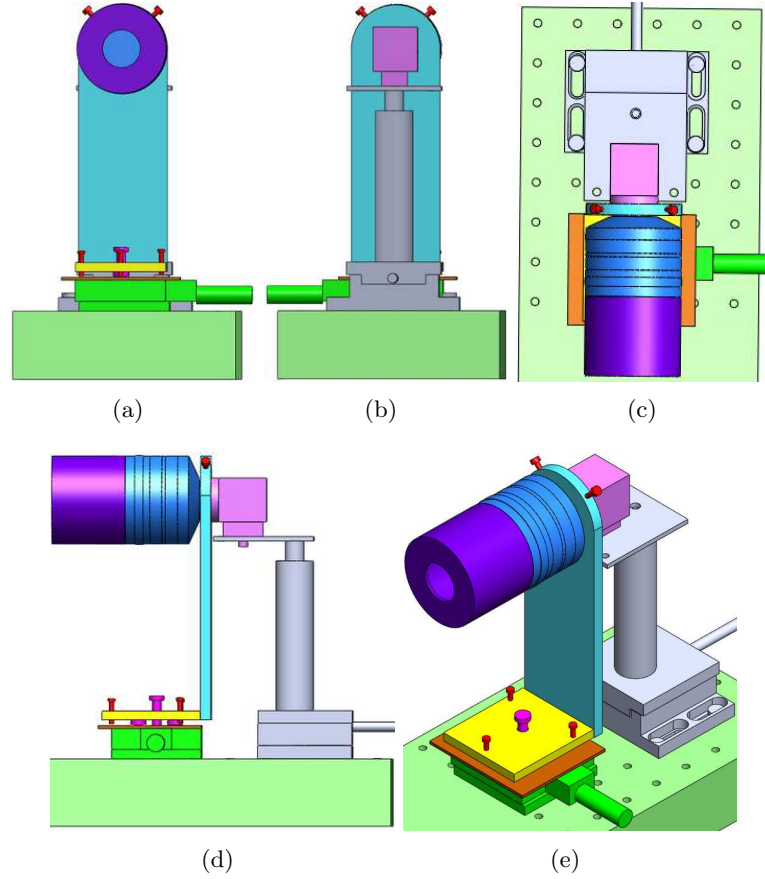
3D model of the camera system designed with SolidWorks 2012 [159]: (a) front view ; (b) back view ; (c) top view ; (d) side view; and (e) the isometric view.
